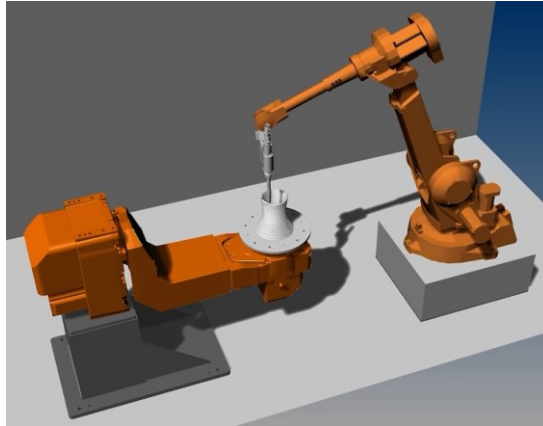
Robotic welding facility with robot arm and roto-tilting table
